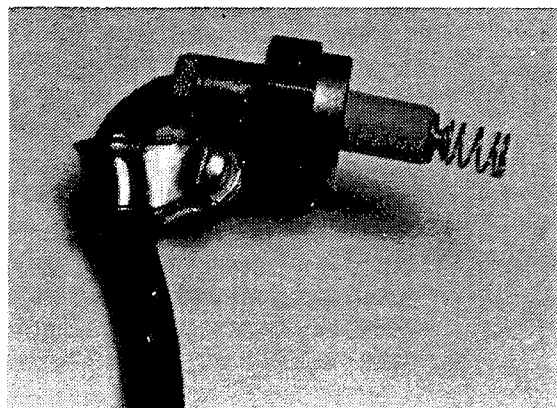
B. INSTALLATION OF ELBOW CLAMP.
